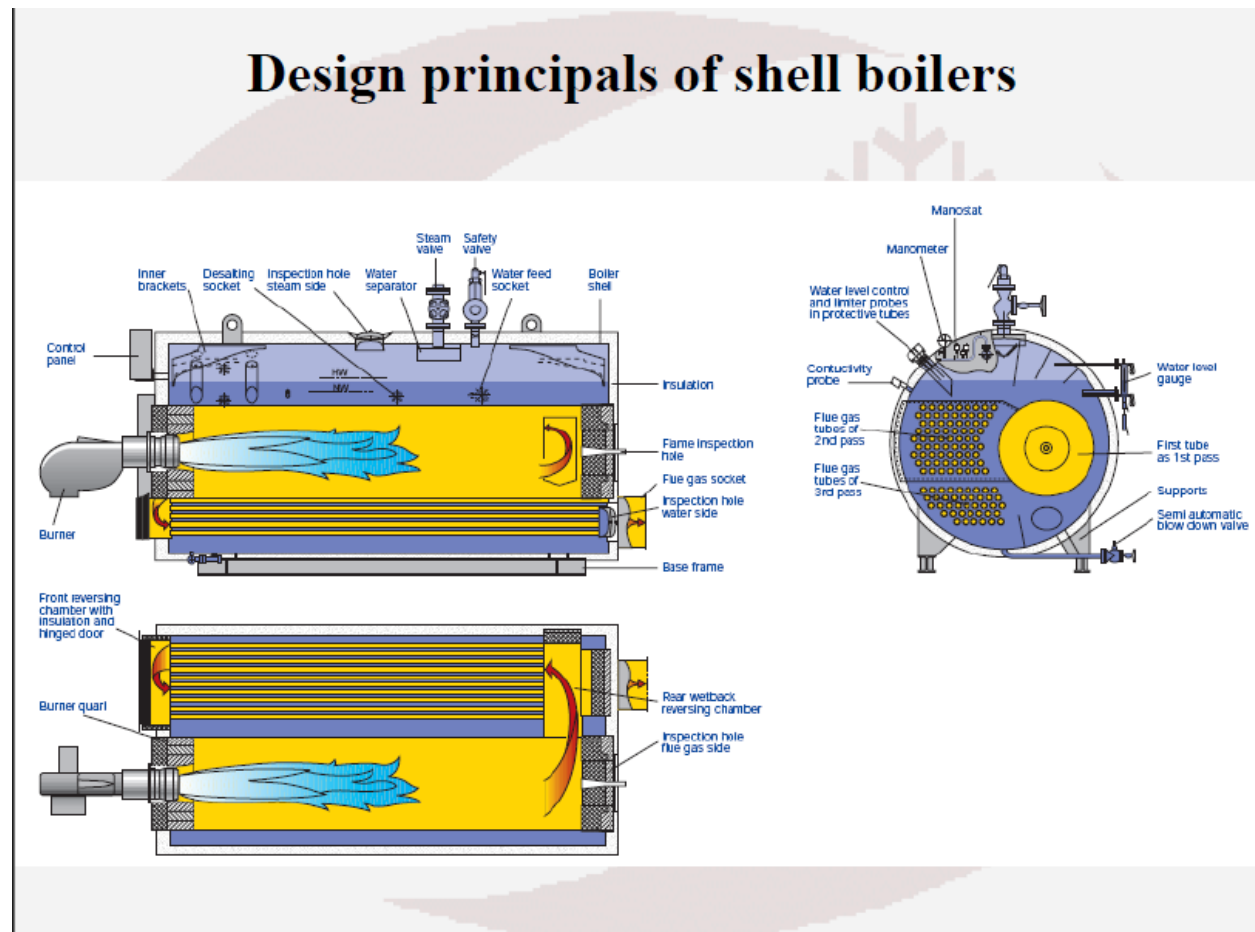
Typical design principles of shell boilers, highlighting furnace, passes, drum and auxiliary equipment.
